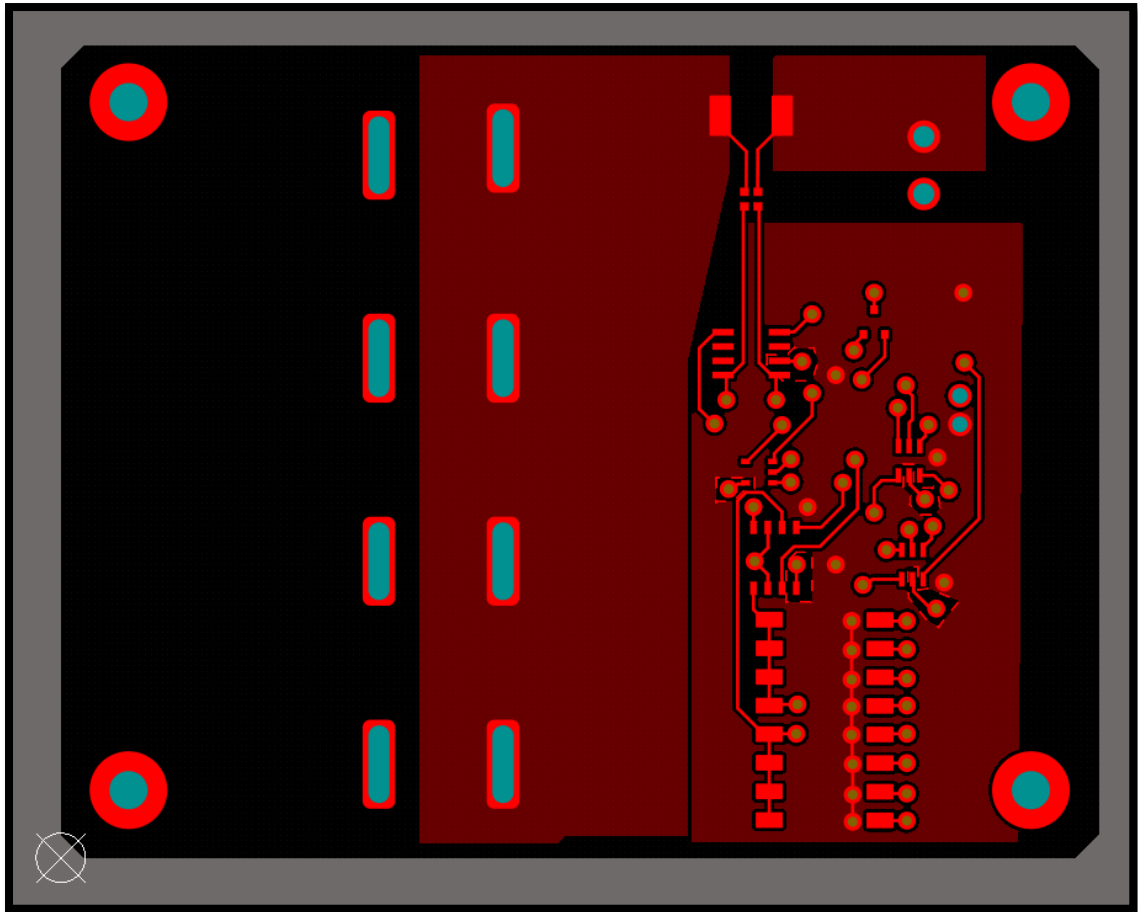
The 2D View of the Top Layer of the Finalized PCB
